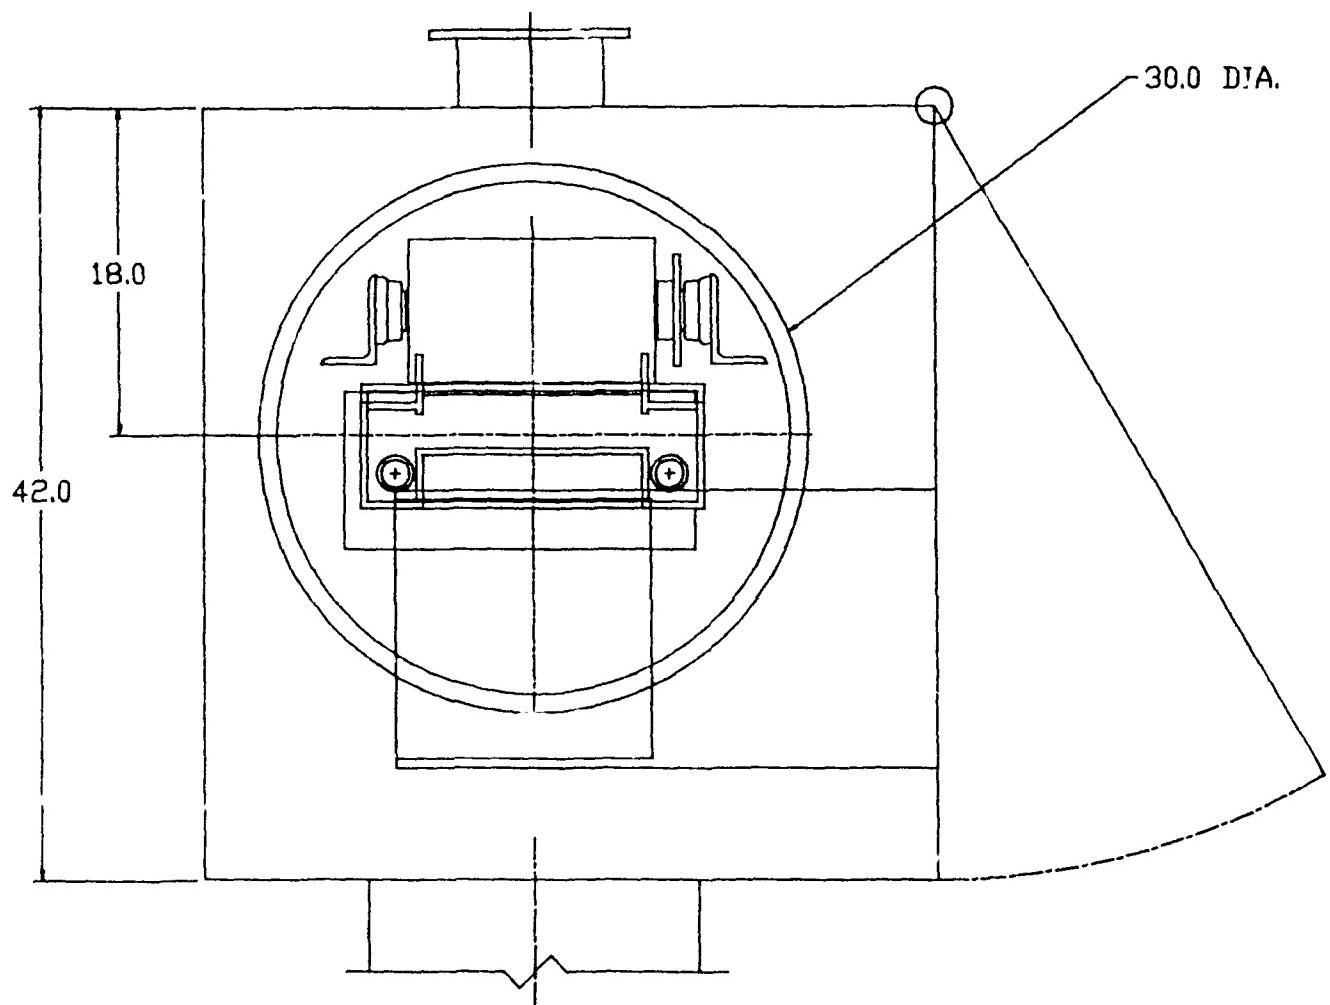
Drawing of Melt Overflow Casting Machine (top view)
